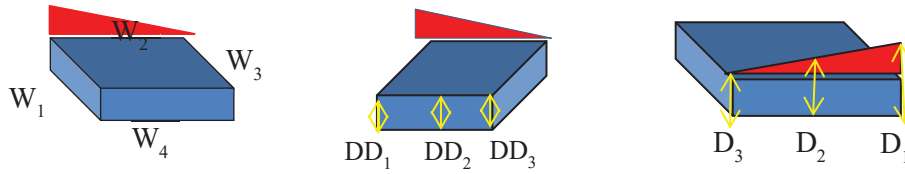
Dimensions of End Cap plate with a weld on one edge
